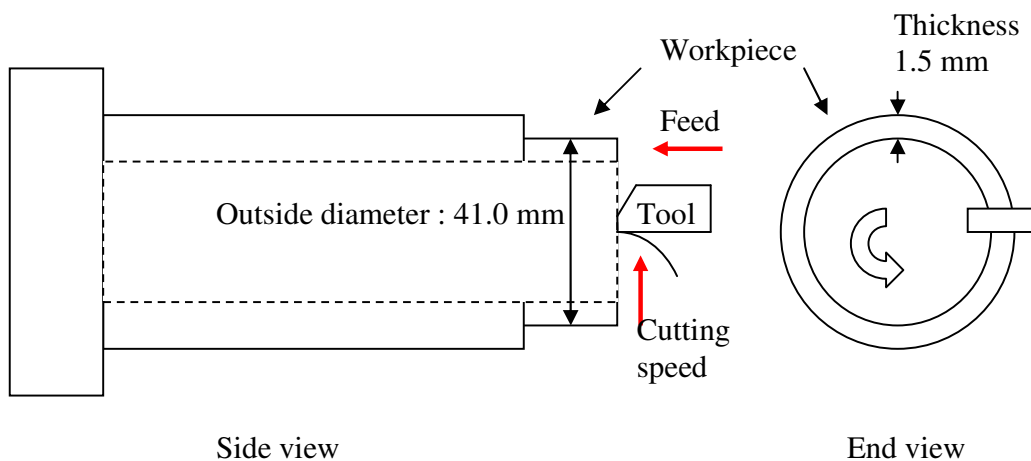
Schematic diagram of the orthogonal machining performed on a lathe.
